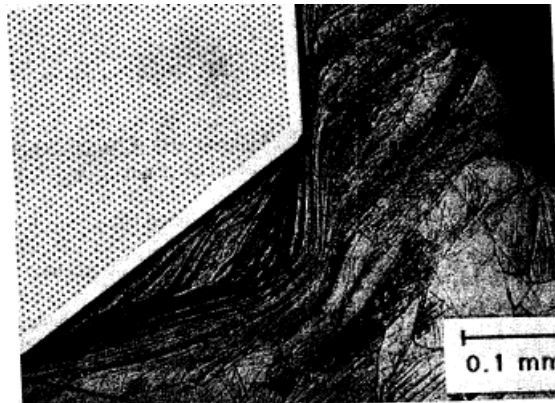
Dead metal zone when machining austenitic stainless steel with a chamfered tool with 60° rake angle at cutting speed 45 m/min (Zhang et al. (1991)).
